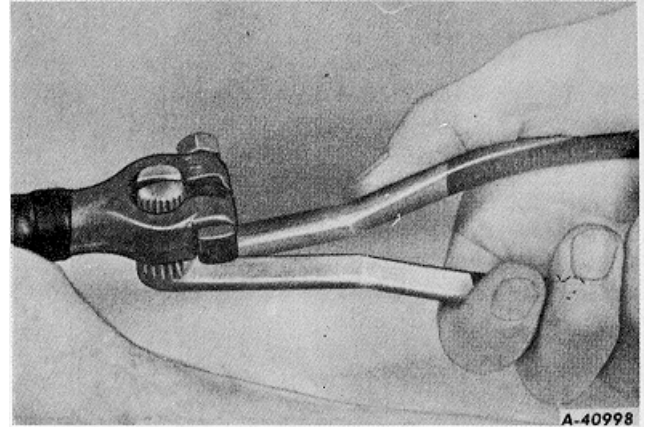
Spreading Cable Clamp with Terminal Spreader
